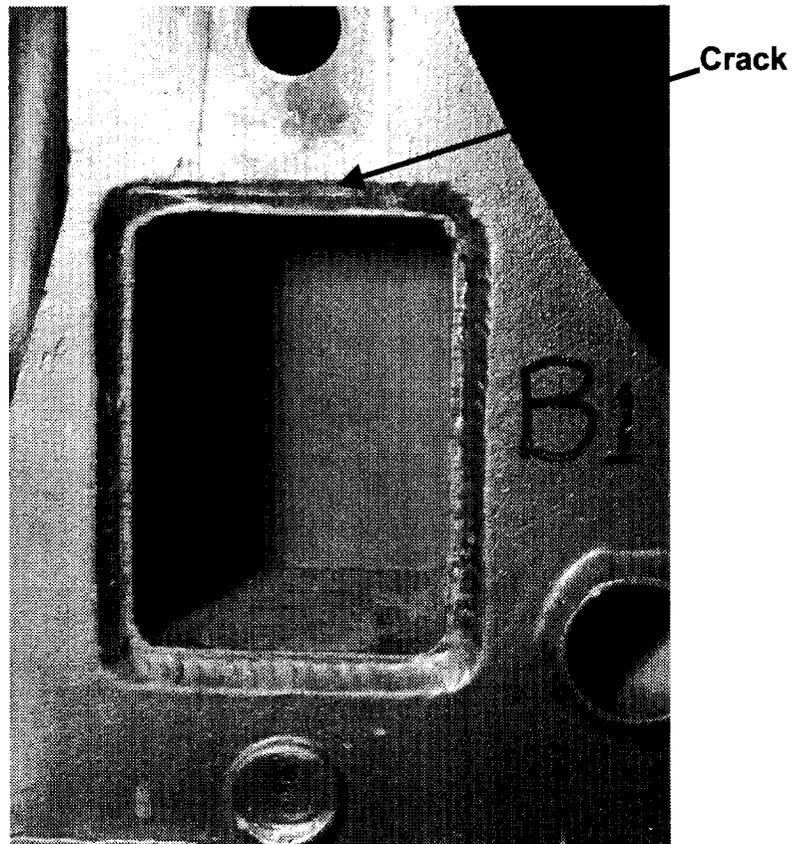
Weld cracks on caster assembly receptacle on cradle.
